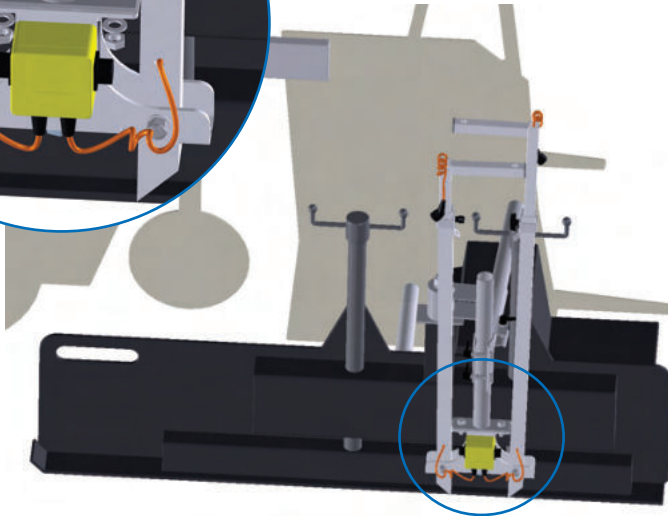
Installation of Sensor Beam on Rear Beam Mounting
